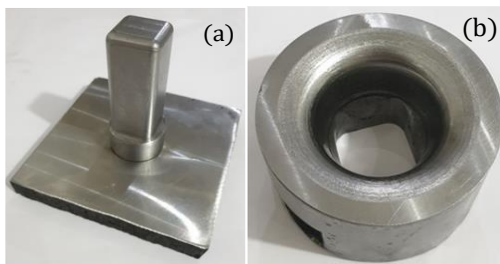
Manufactured tools: (a) punch, shoe, and (b) die.
